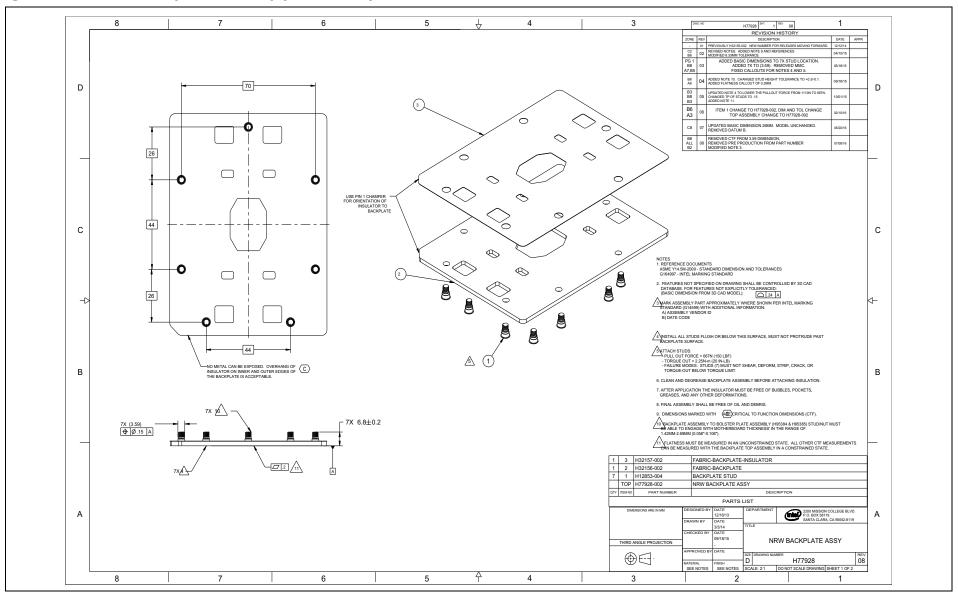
Narrow Backplate Assembly (Sheet 2 of 2)
